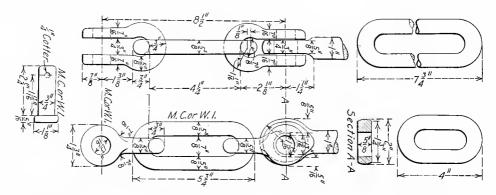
M. C. B. Standard Uncoupling Attachments. (M. C. B. Sheet 23A.)
